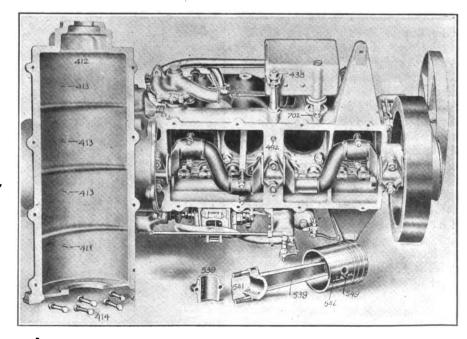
THE CYLINDERS AND CRANK SHAFT FROM BELOW
